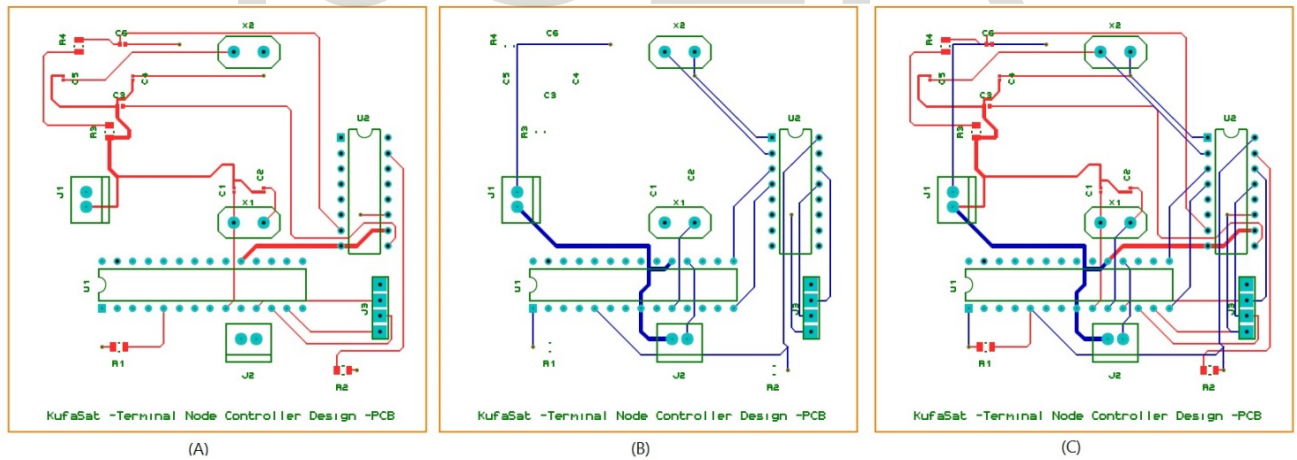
TNC PCB Layout A-Top, B-Bottom, C-Two Layer
